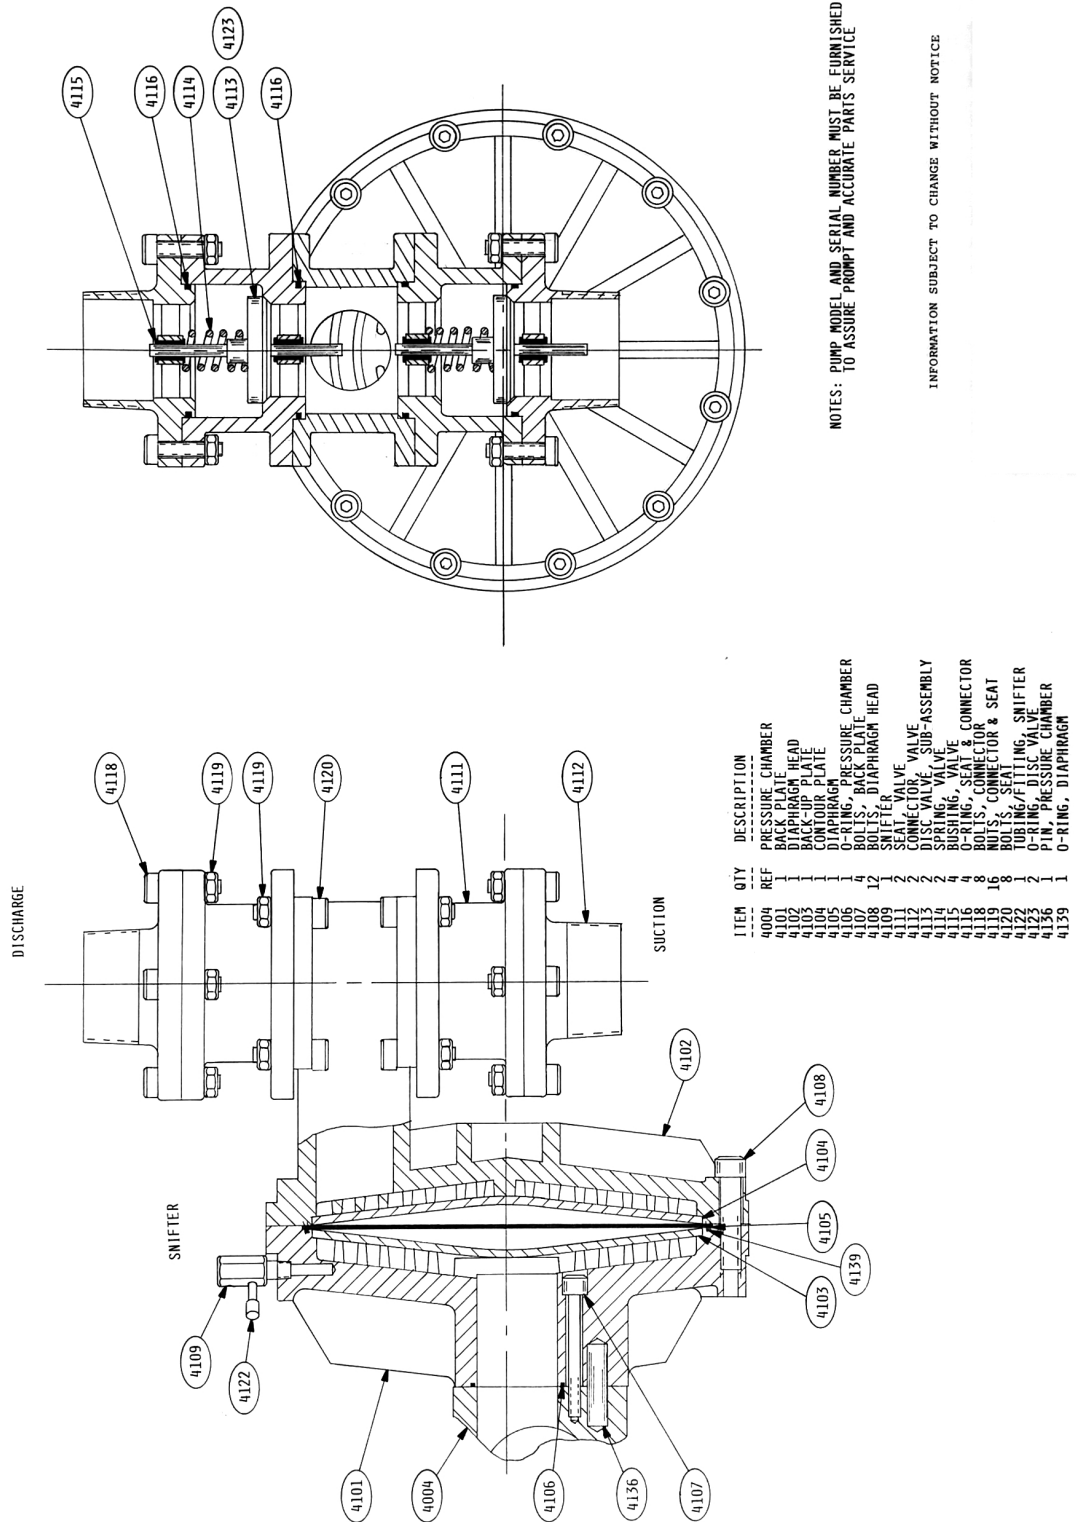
Liquid End - Metallic .85" & 1.1" Plunger w/ 1-1/4" Disc Valve
